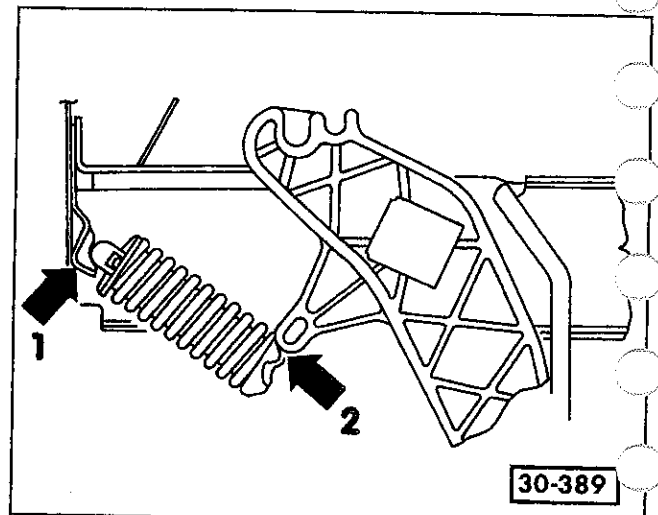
Install clutch over-center spring by inserting into bracket and then pressing into pedal mounting lug (2).
